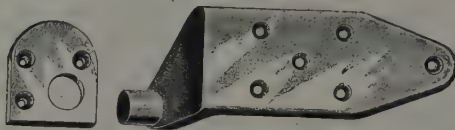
Sofa Back Pivot, Hinge and Bushing.
